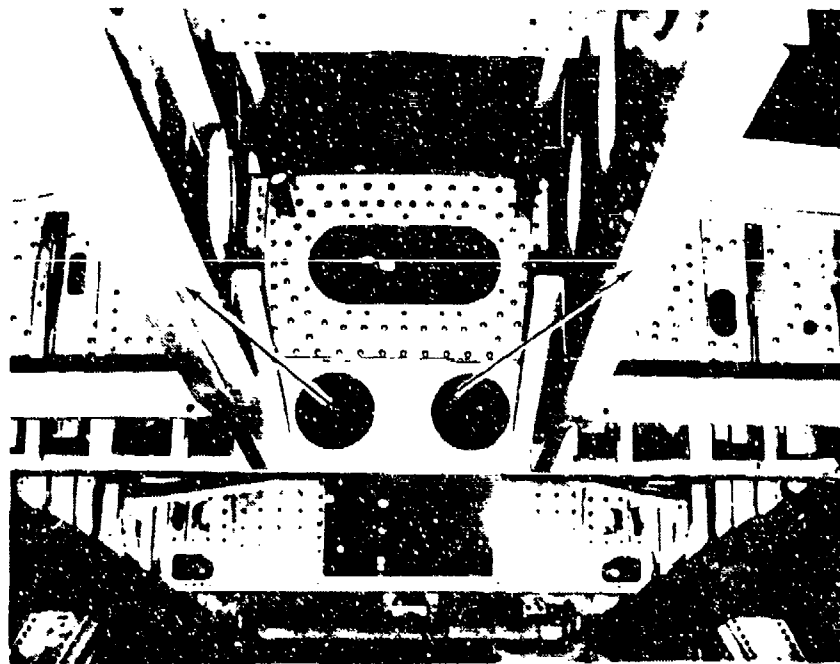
TYPICAL FULL-DEPTH LONGITUDINAL BEAMS FOR OVERHEAD SUPPORT OF LARGE MASS ITEMS AND LONGITUDINAL CONTINUITY OF STRUCTURE.
